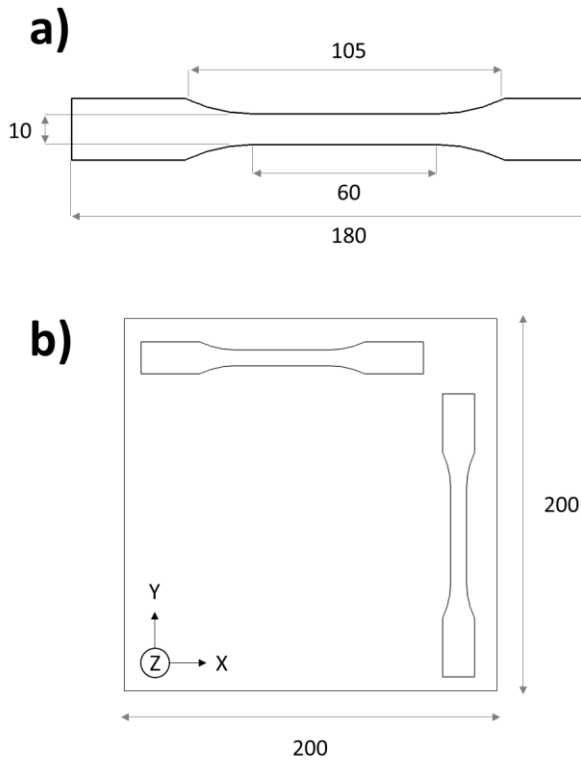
Dog-bone shaped strain test specimen a) Dimensions in 4mm thickness b) 3D Printing position on Print bed. (Dimensions given in mm unit)
